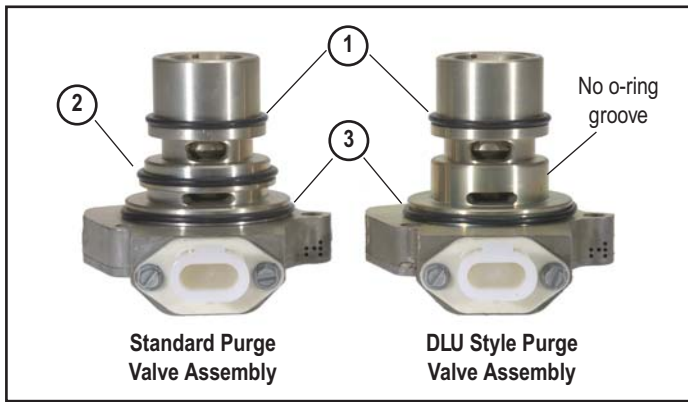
Standard and DLU Style Purge Valve Assembly Identification
